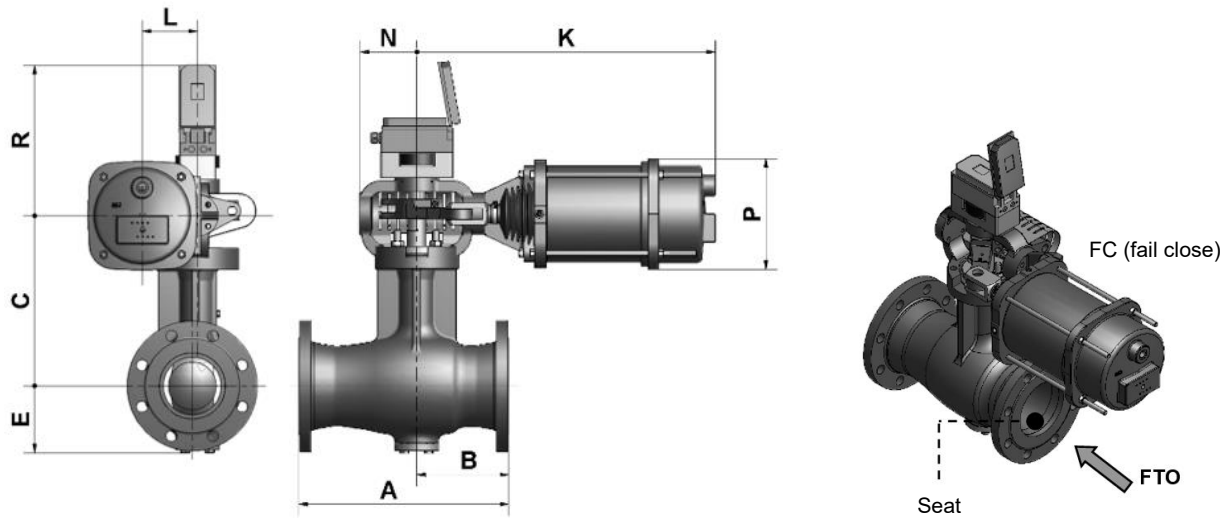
Dimensions - Control valve Type 72.3-02/R · Assembly position A · FC (fail close)
